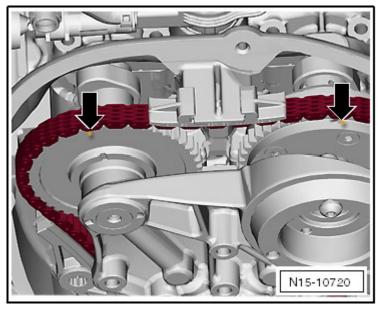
Identifying Mark Points On Intake And Exhaust Camshafts
